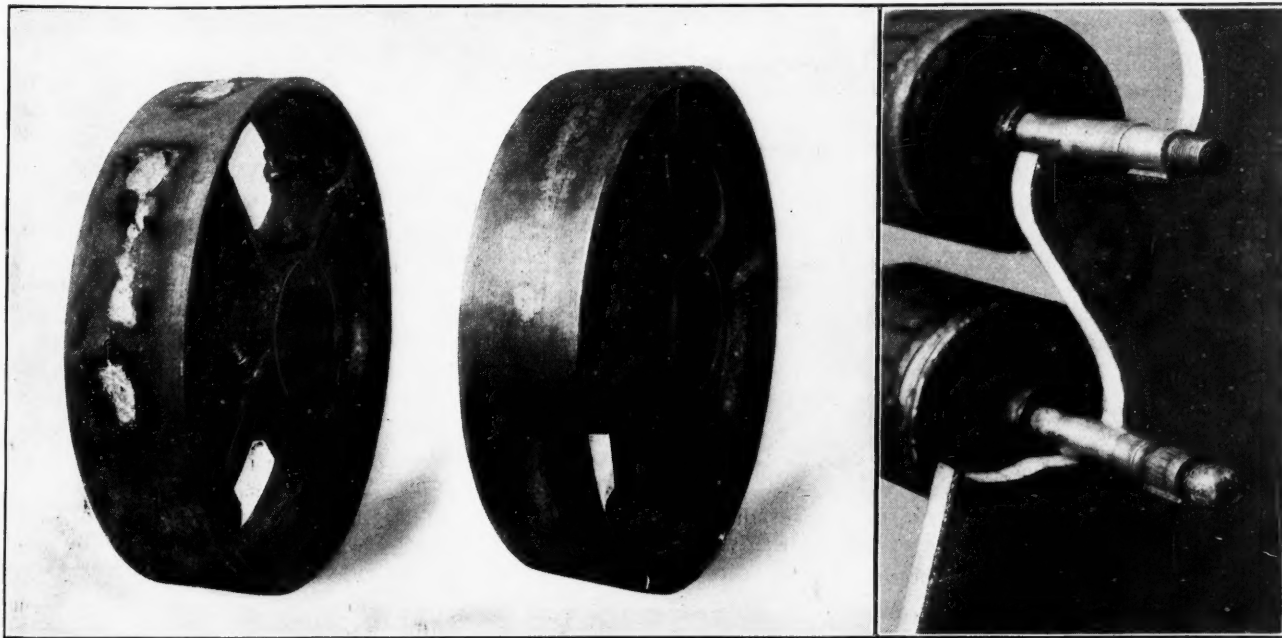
BLOW-HOLES IN A PULLEY REPAIRED BY ELECTRIC WELDING BEFORE FINAL FINISHING WAS COMPLETE
